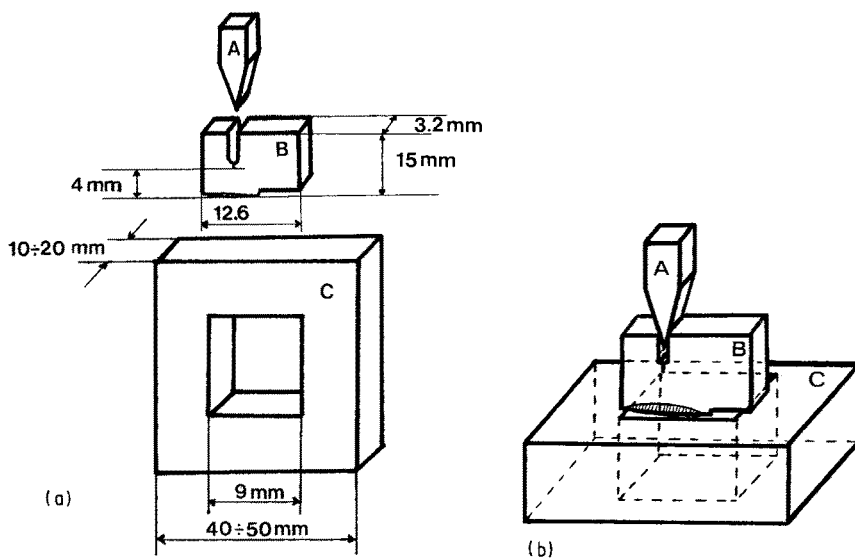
Technique for the transversal cold-dissection of the ductile fracture surfaces. (a) Specimen and base dimensions. (b) Placement of the specimen. (A, wedge, B, specimen, C, Metallic base).
